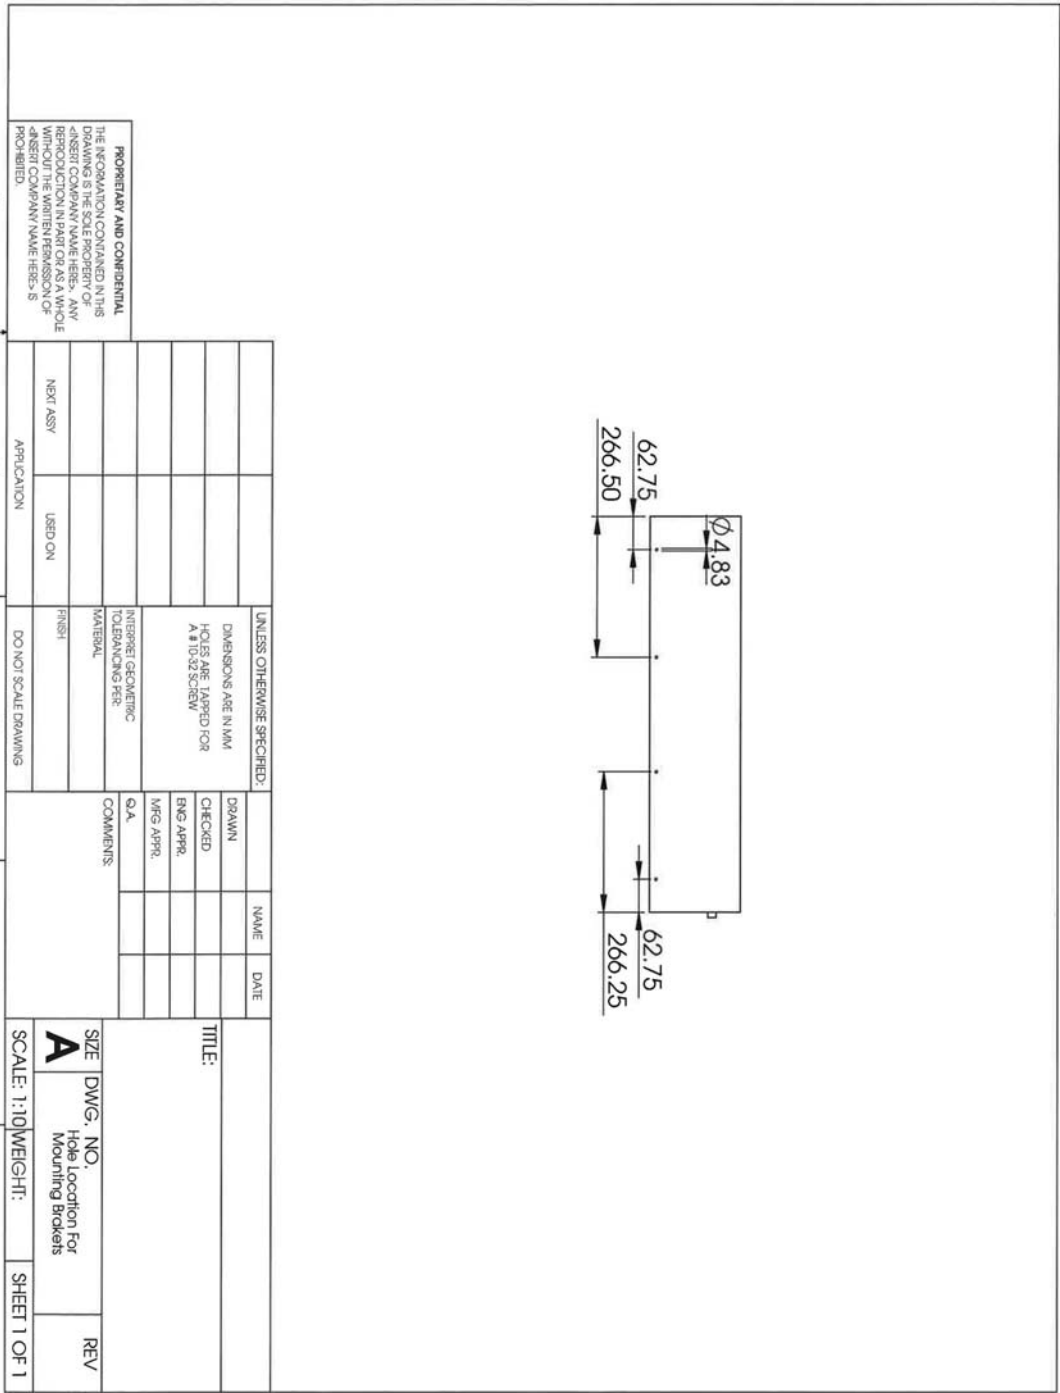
Side view of the gamma ray detection module, which shows the required location and diameter of the mounting holes.
